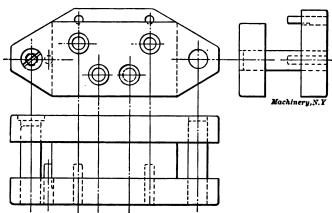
Jig in Fig. 84 Improved by adding Locating Pins
